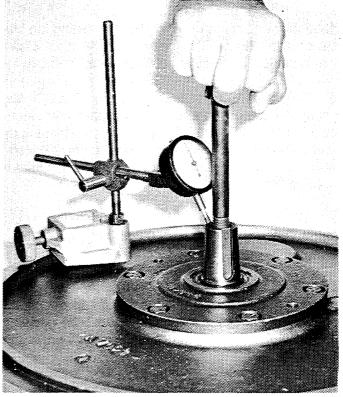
Applying Pushing Force While Dial Indicating End Play of Input Shaft.
